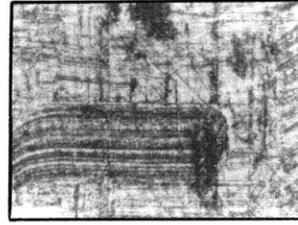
Surface of a Lens Ring too Tightly Compressed with Imprints of Machine Scores Destroyed by Slip
